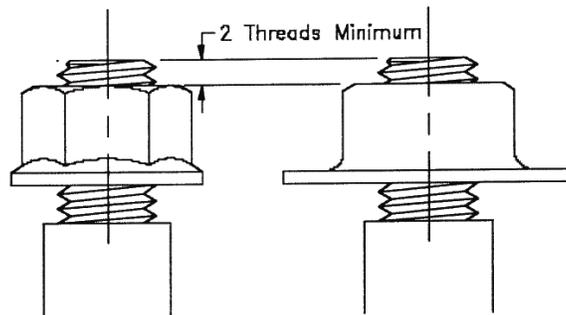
Minimum Bolt Thread Protrusion through Self-Locking Nuts and Nut-Plates
